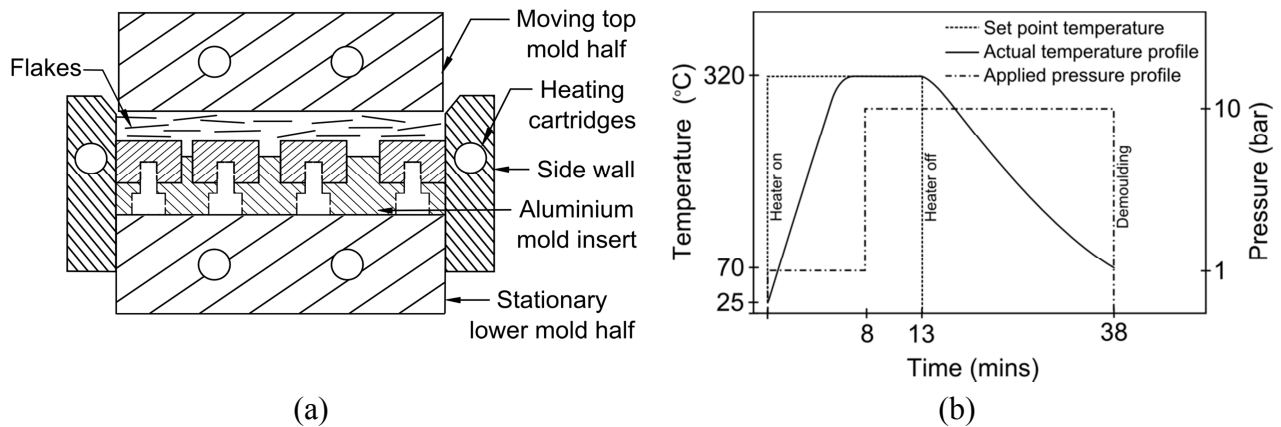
(a) Sectional view of the molding setup with the modular aluminium insert in place and cavity filled with flakes. (b) Typical process cycle.
